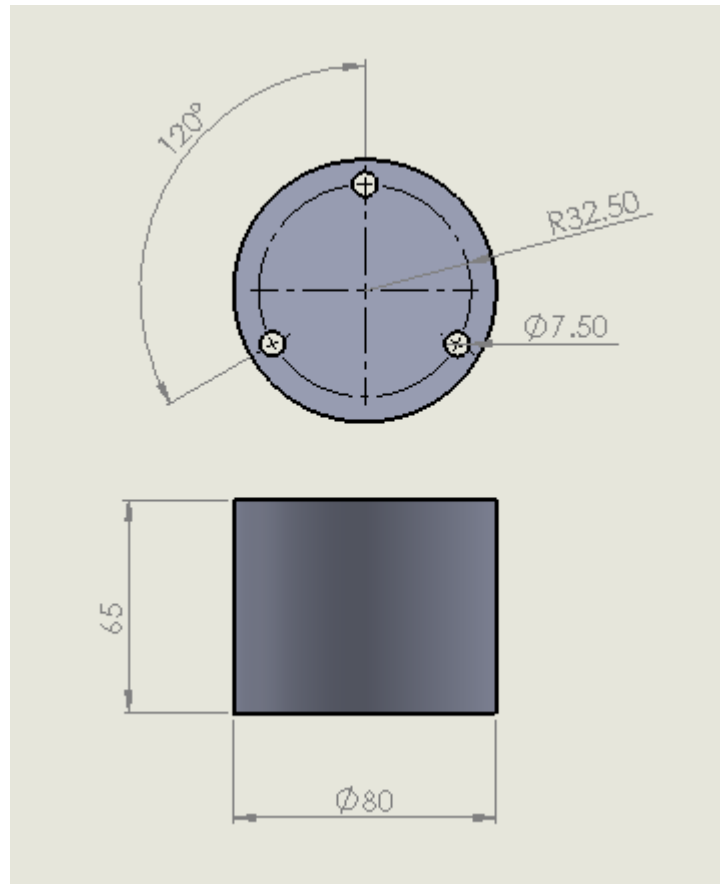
Dimensioned drawing of the bottom cylindrical radiation shield.
